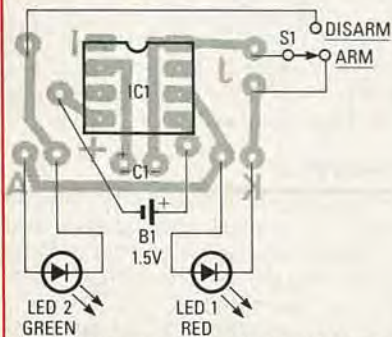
THE CIRCUIT CAN BE BUILT on a tiny PC board. The pattern is provided in our PC Service section.
